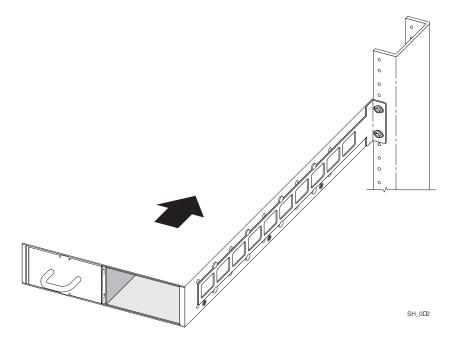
Attaching a Rear Mounting Bracket—Two-Post Rack Installation
